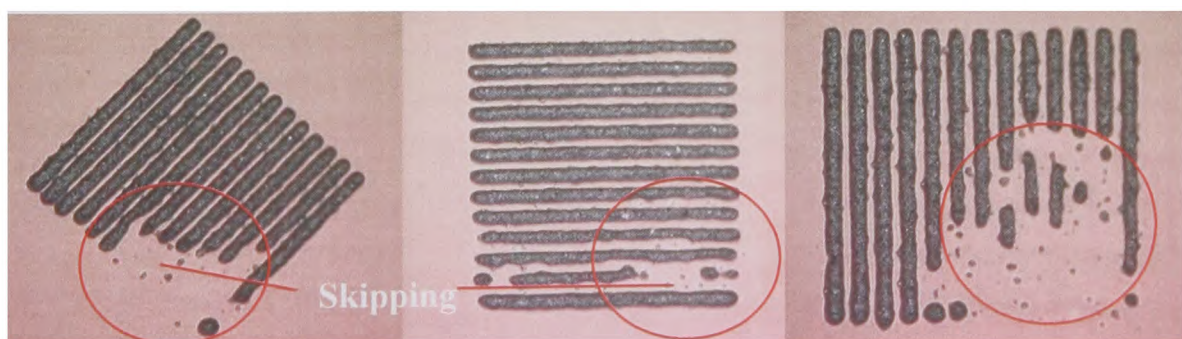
Typical printing results due to excessively high viscosity solder paste.
